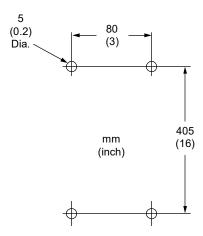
Installing the Mounting Brackets to the Rectifier
